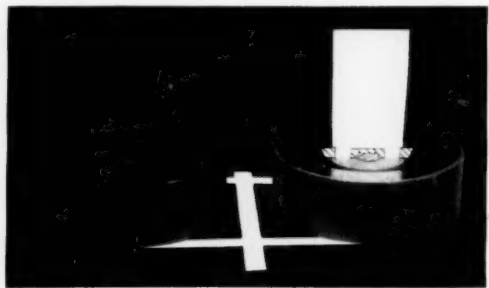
The sample casting was made without risers, and with flange and hand-cut gating all in the cope.
